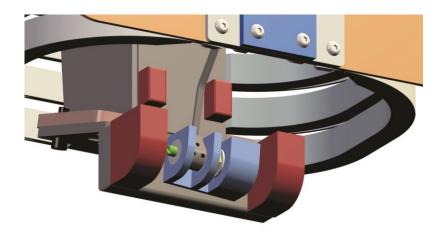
Lower sternum stops mounted to the spine
